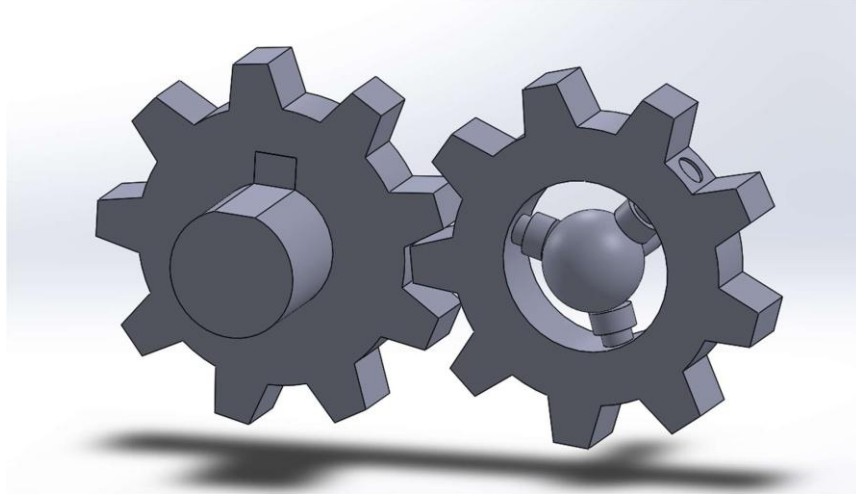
Interlocking gears, with the left gear connected to the motor via a gear shaft.
